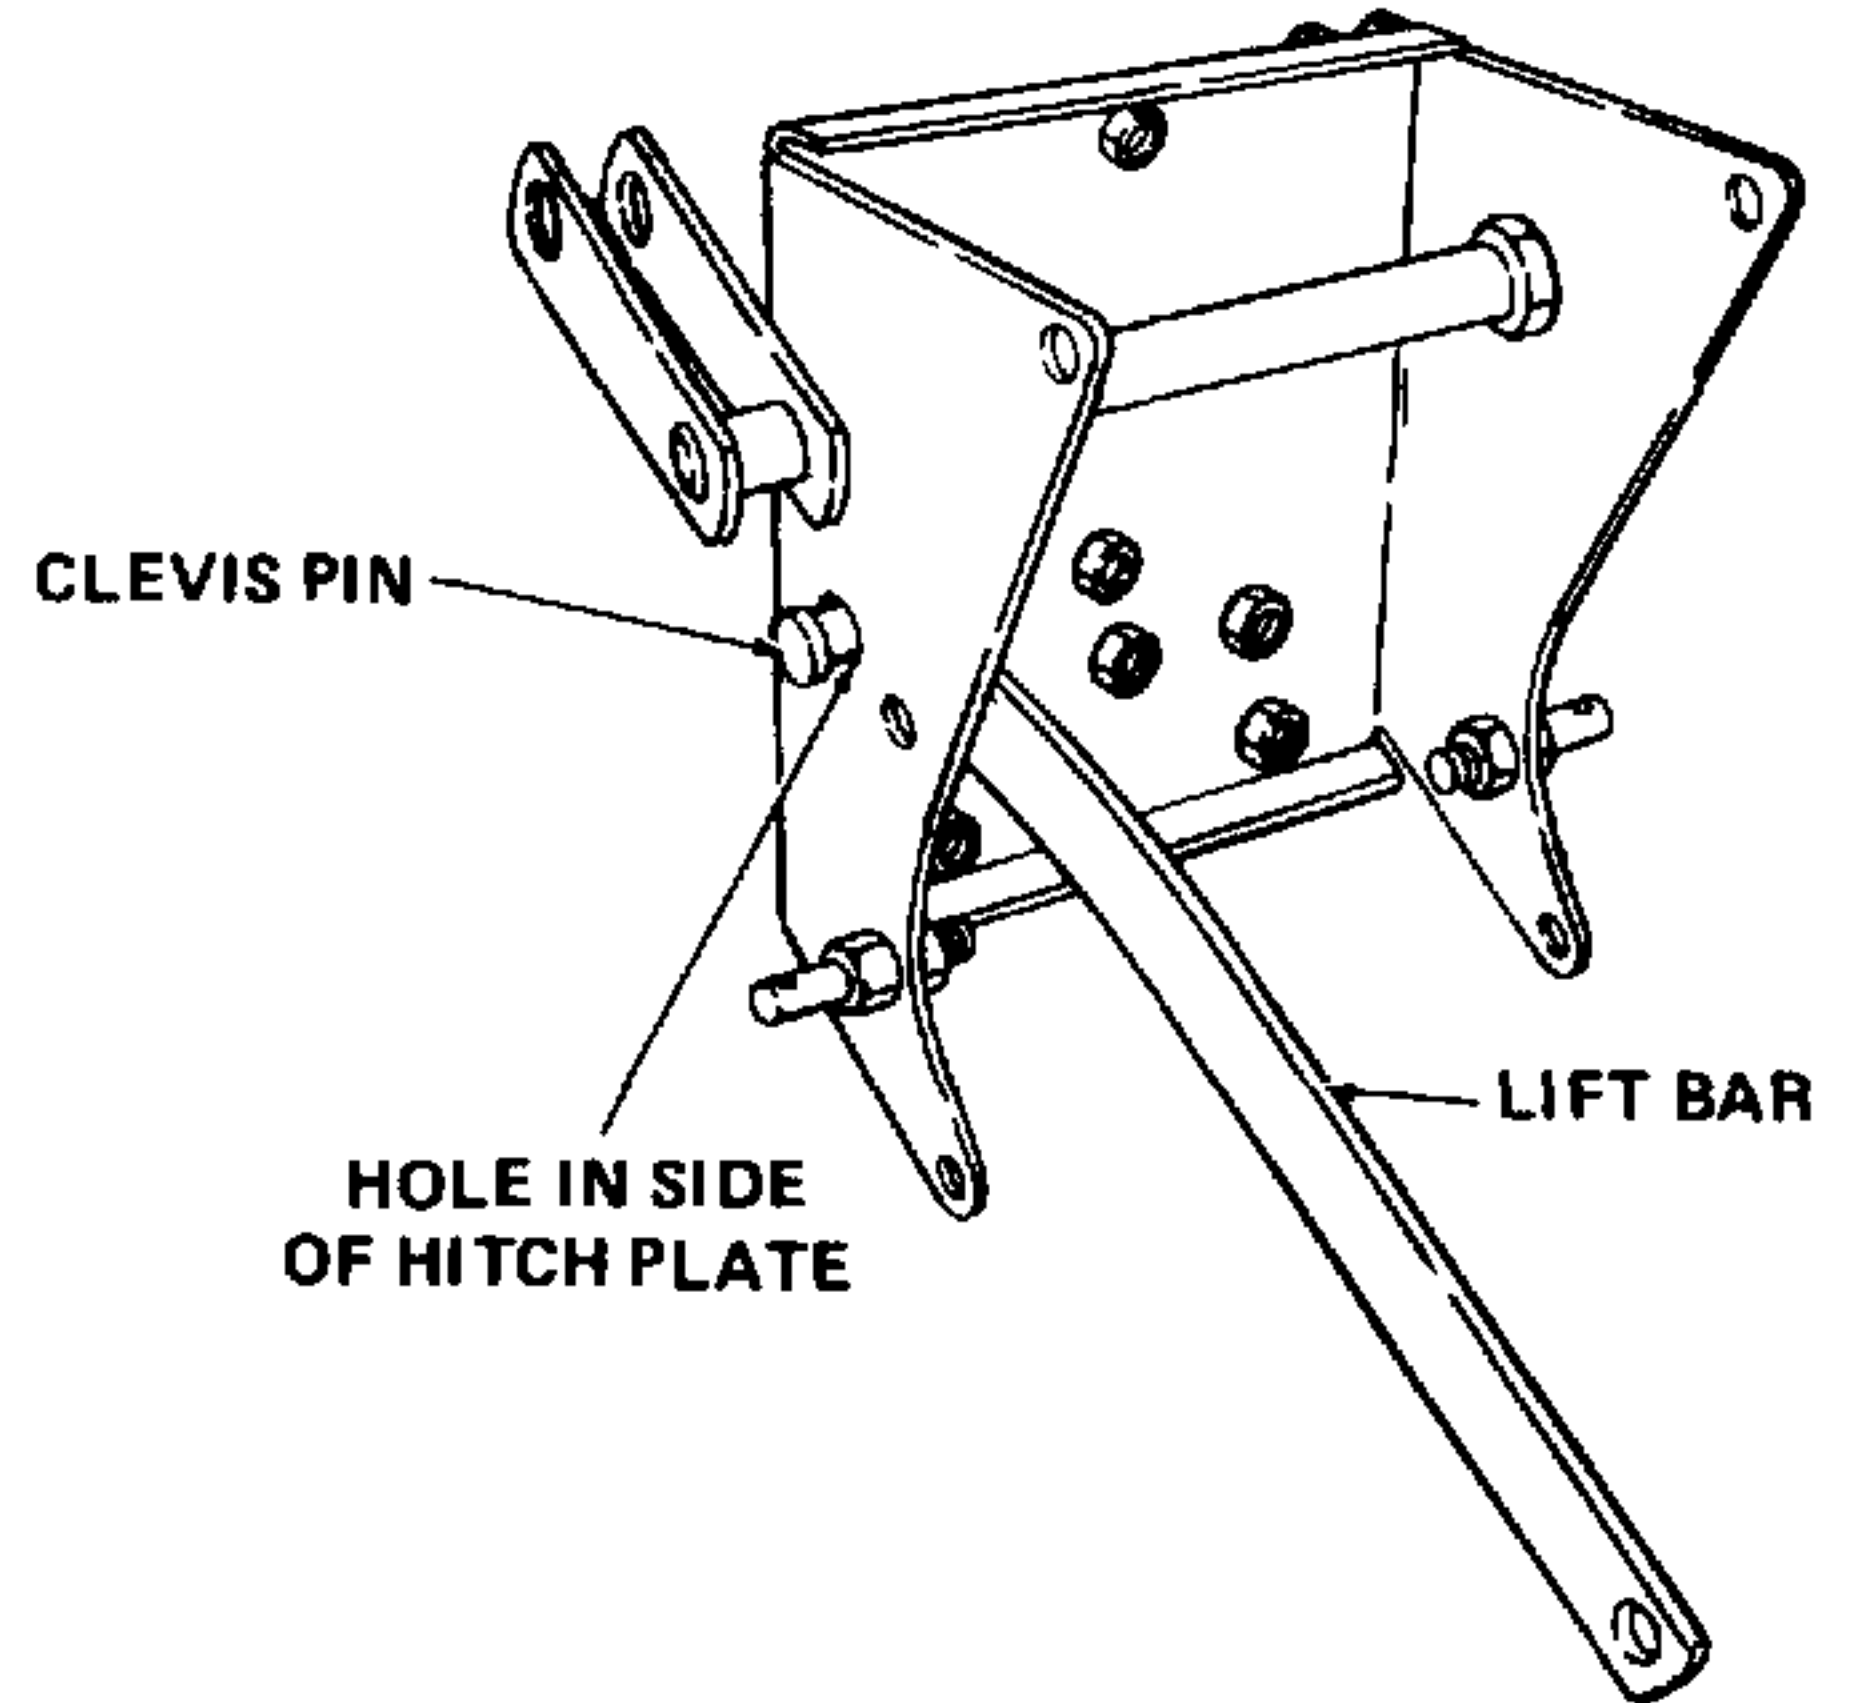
Inserting Clevis Pin in Hitch Plate Assembly.
